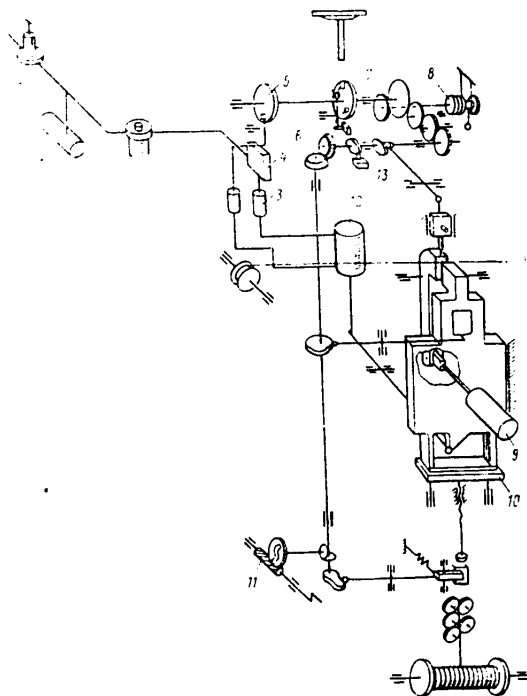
Kinematic schematic of the mechanism for welding the lower lead and the tinning mechanism.
